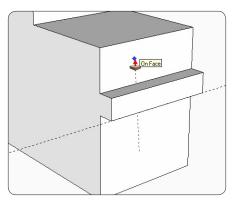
Using the Push/Pull Tool to finish the tongue. Here, you hover the tool over the face above the tongue to quickly set the proper depth. That's actually faster than typing a value.
